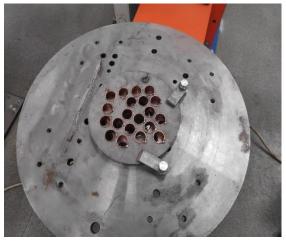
The test piece used to perform robotic welding of copper pipes
